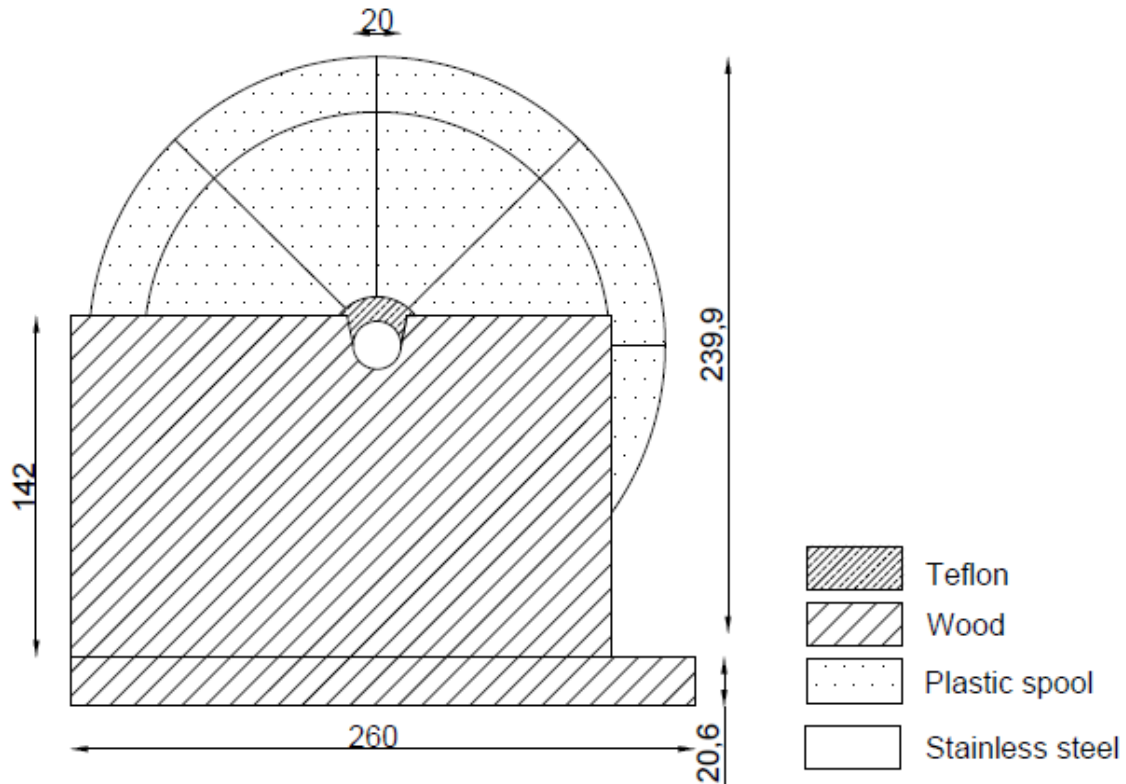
Mechanical drawing of Unit 1 - feed of optical fibre (front view; dimensions in mm)
